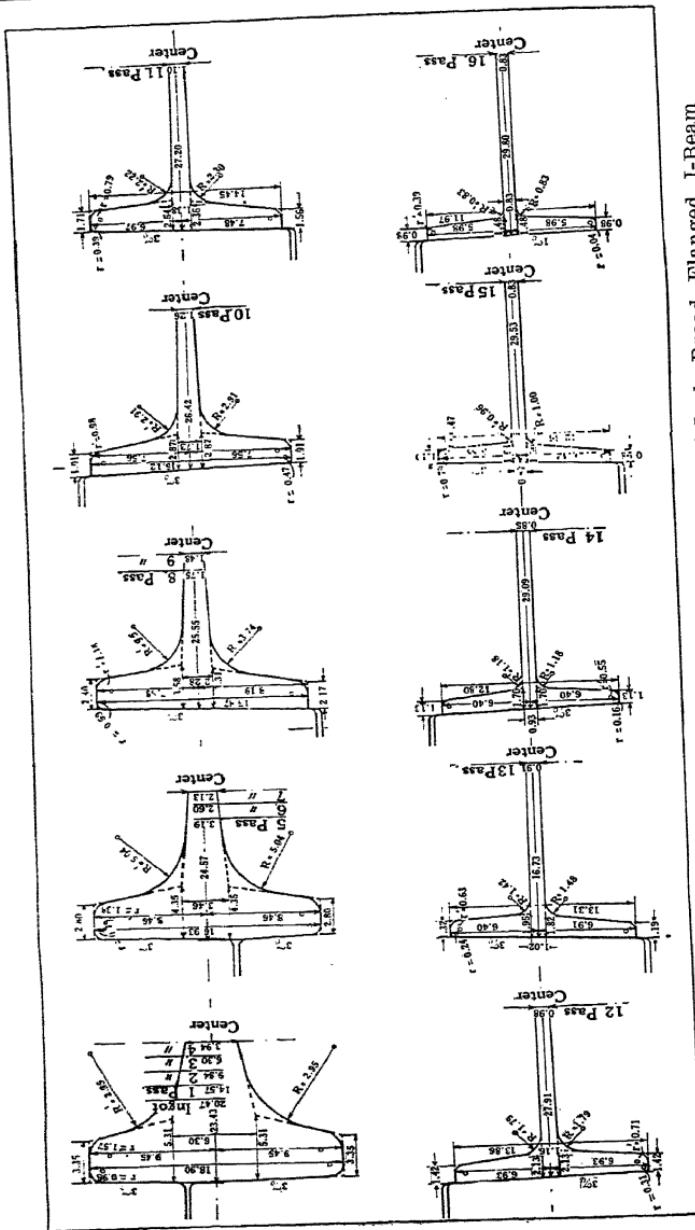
Details of the Pass Design of a 29.528 x 11.61-Inch Broad Flanged I-Beam
